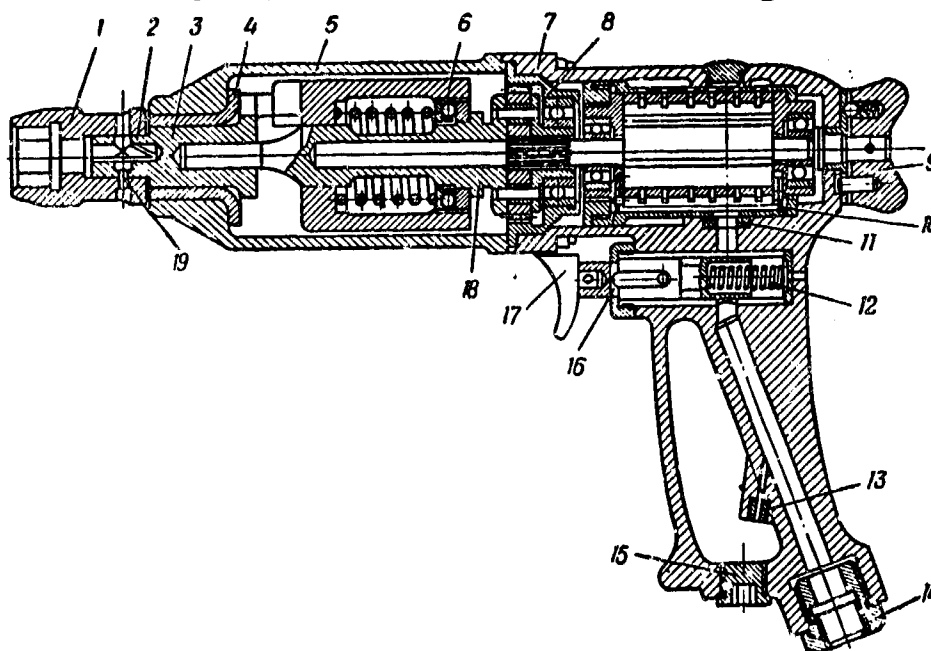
Pneumatic Wrench: 1 - removal end wrench; 2 - spring;
